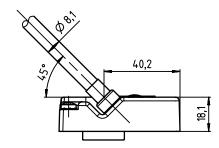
Dimensioned drawing MK 301 connection hood
